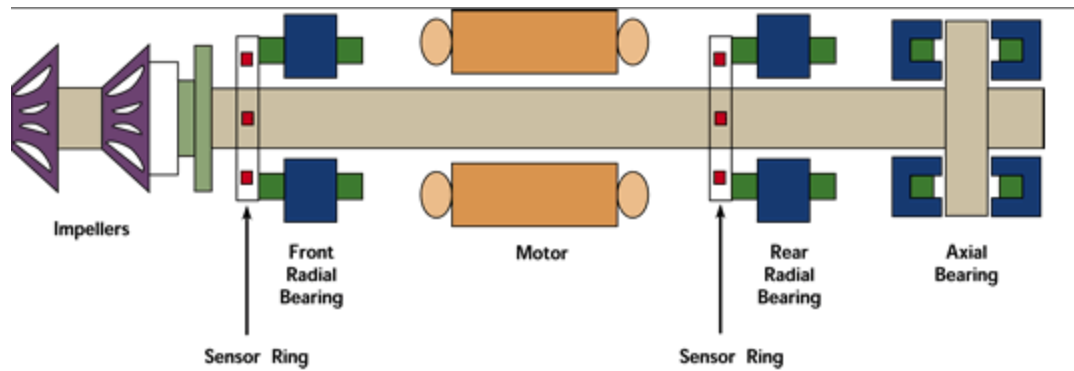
Illustration of compressor shaft relative to the magnetic bearings.²
